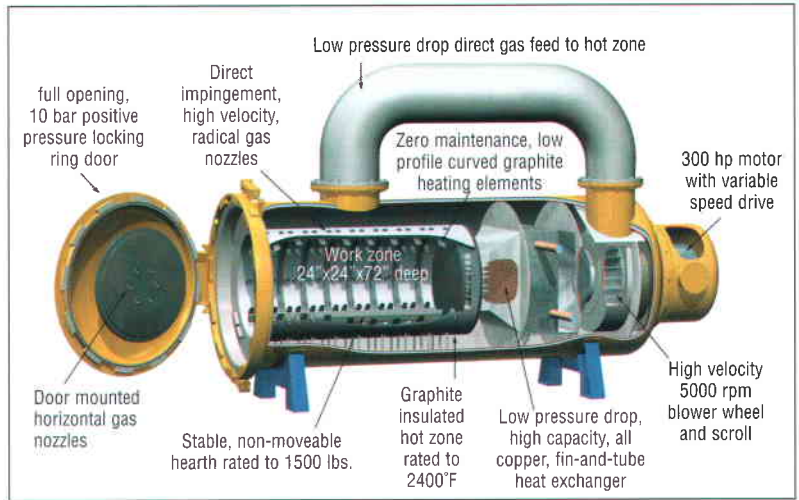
Details of the Solar low-torr range vacuum carburizing chamber and high-speed gas quench system
